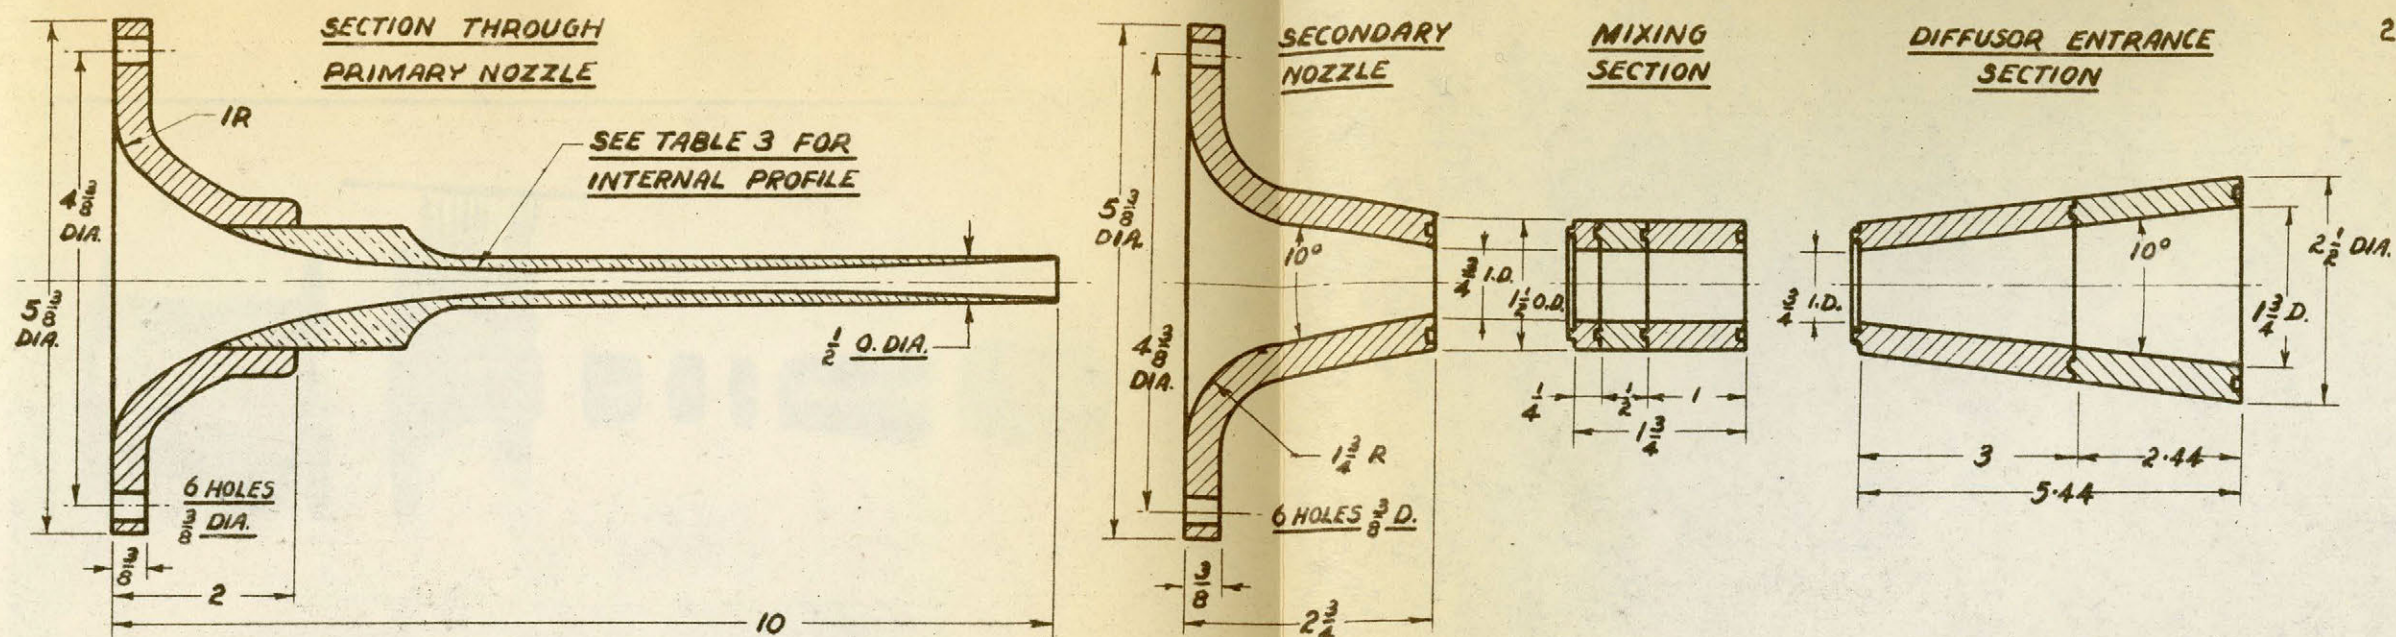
SECTIONAL VIEW OF NOZZLES AND MIXING SECTION
